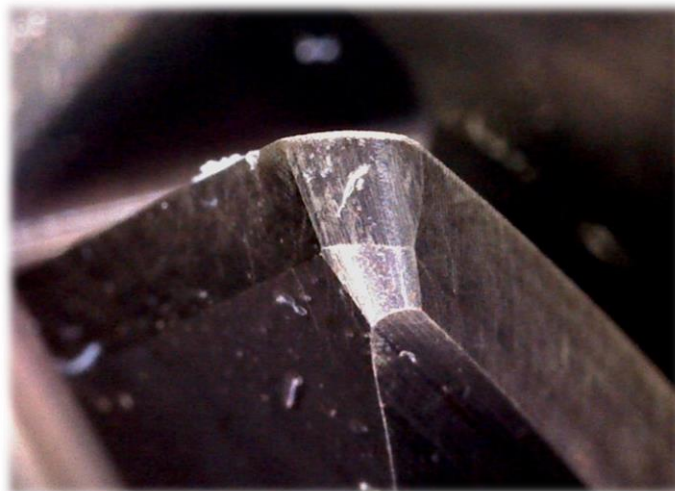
The cutting edge of a Z-Carb tool after it has been used to cut Ti-64 with titanium settings
